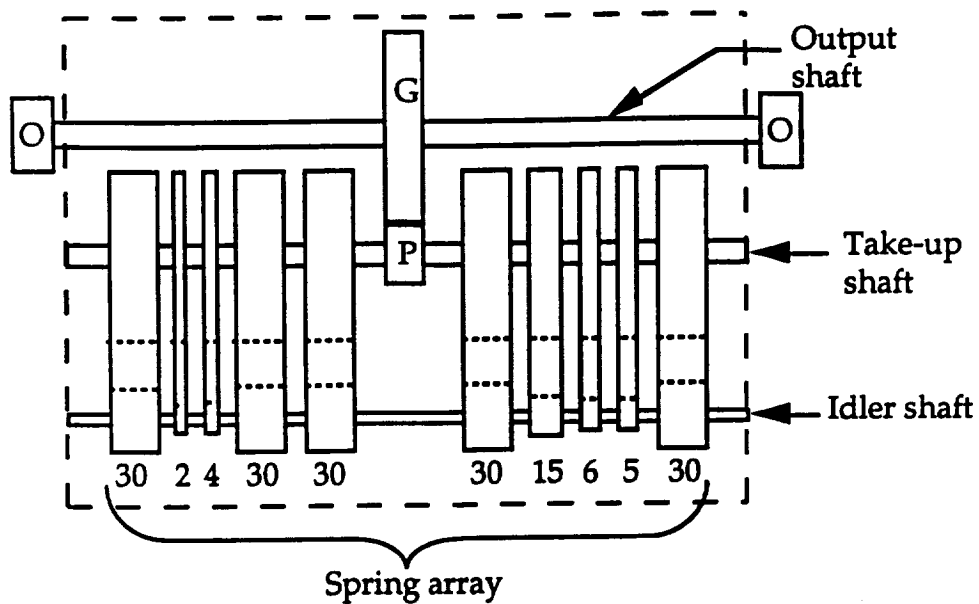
Final design configuration of the RED force unit. Numbers indicate the load rating (lbf) for each corresponding spring. P is the pinion. G is the gear. O is the cable and spool assembly.
